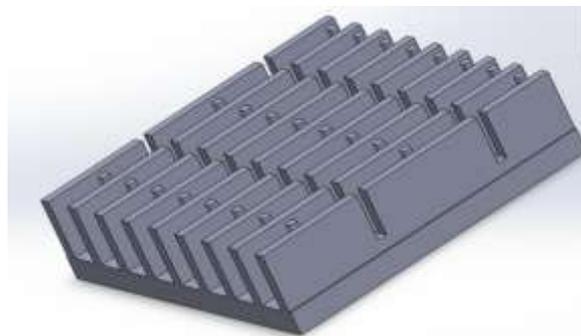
Perforated Plate Pin Fin Heat Sink with cross cut
